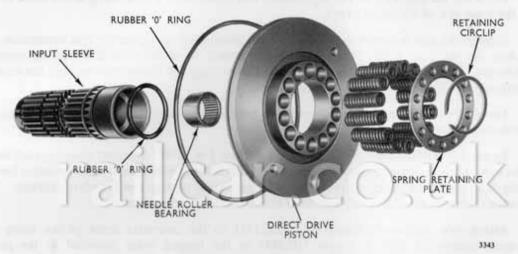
Exploded view of direct-drive piston and input sleeve components
